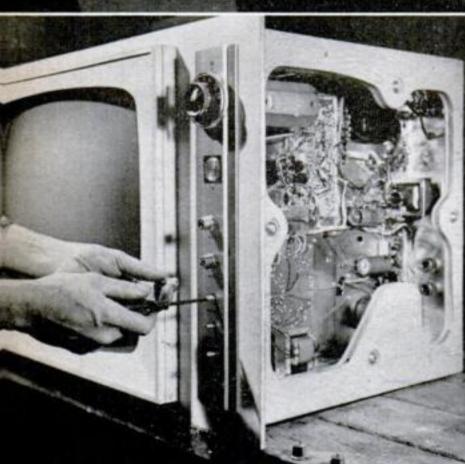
degree-deflection, high-definition type with anti-glare bonded safety glass. Integral molded ears at each corner simplify mounting to front panel. Hardwood mounting blocks supplied with the kit are screwed to the panel to clamp ears. No other mounting brackets or supports are needed.
